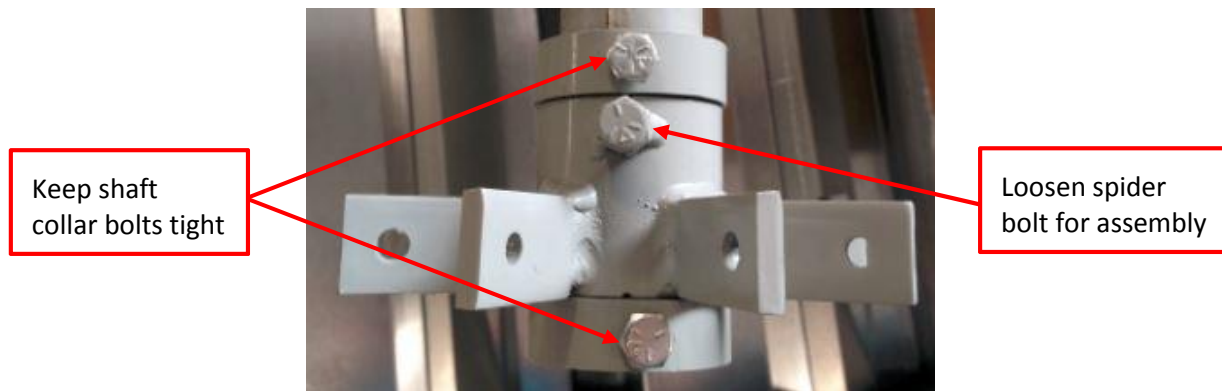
SHAFT COLLARS AND SPIDER ASSEMBLY
